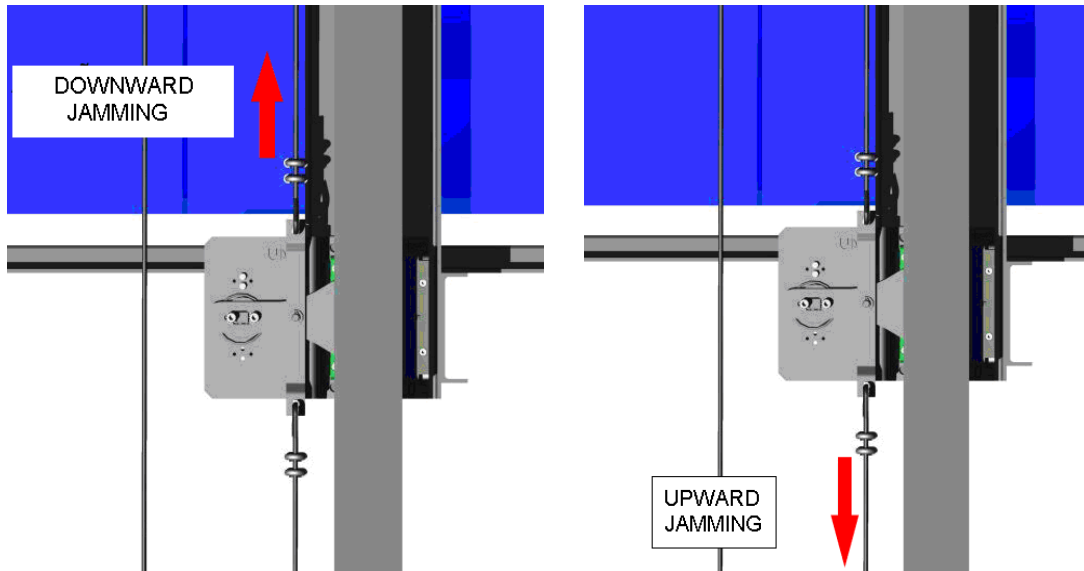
ASG 1 XX Safety Gear + T-25 Steering mechanism
